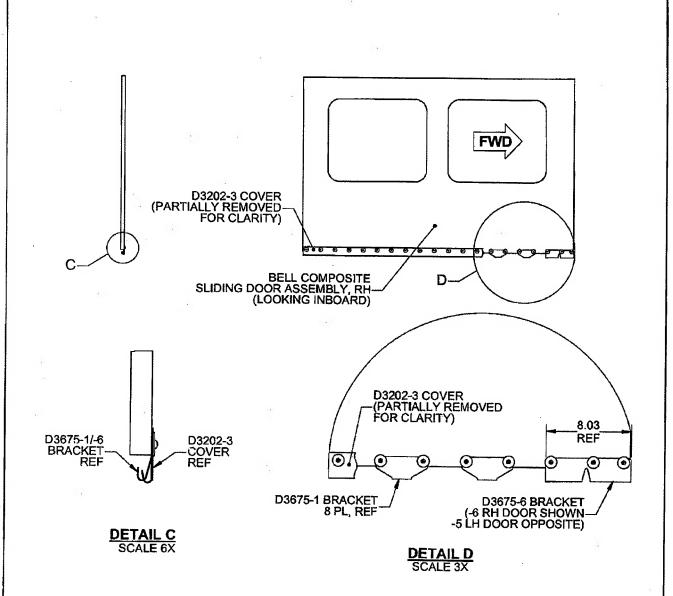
D3675-5/-6 BRACKET INSTALLATION ON COMPOSITE DOORS (-6 SHOWN, -5 OPPOSITE)
